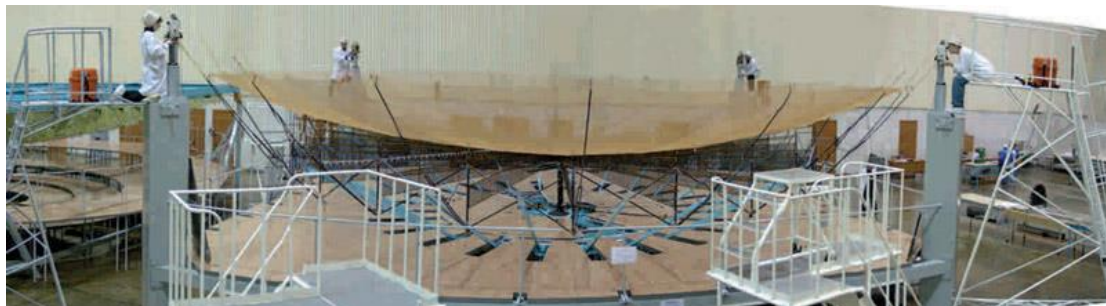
Geodesic shape measurement method for reflecting surfaces
